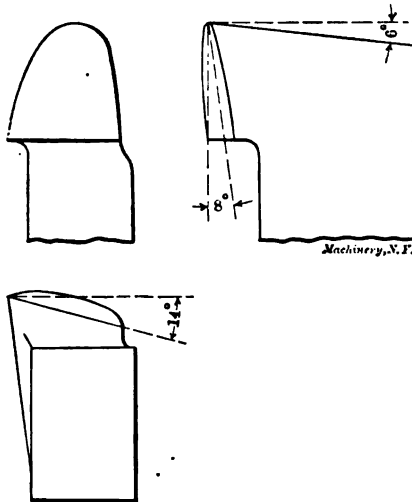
Tool for Cutting Cast Iron and Hard Steel.
